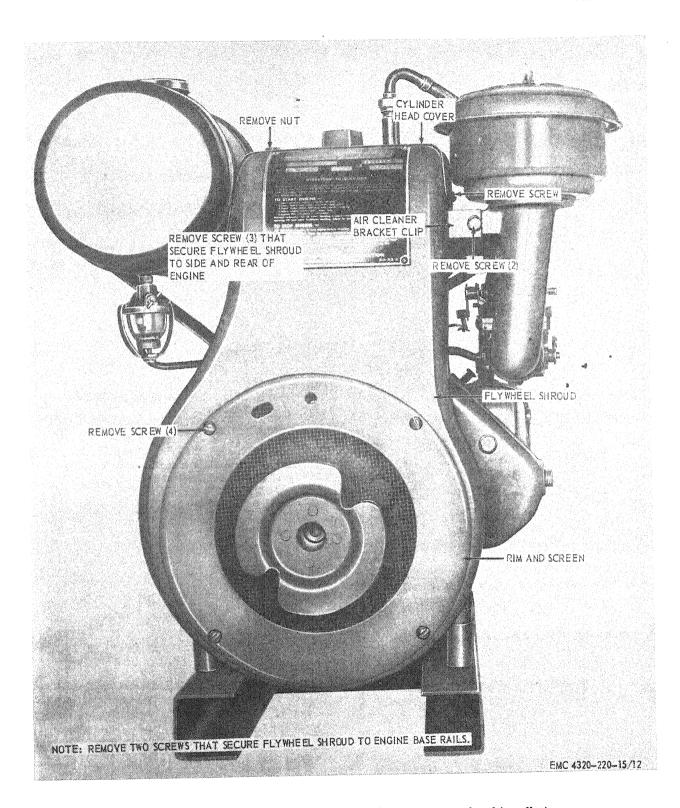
Cylinder head cover and flywheel shroud, removal and installation.
